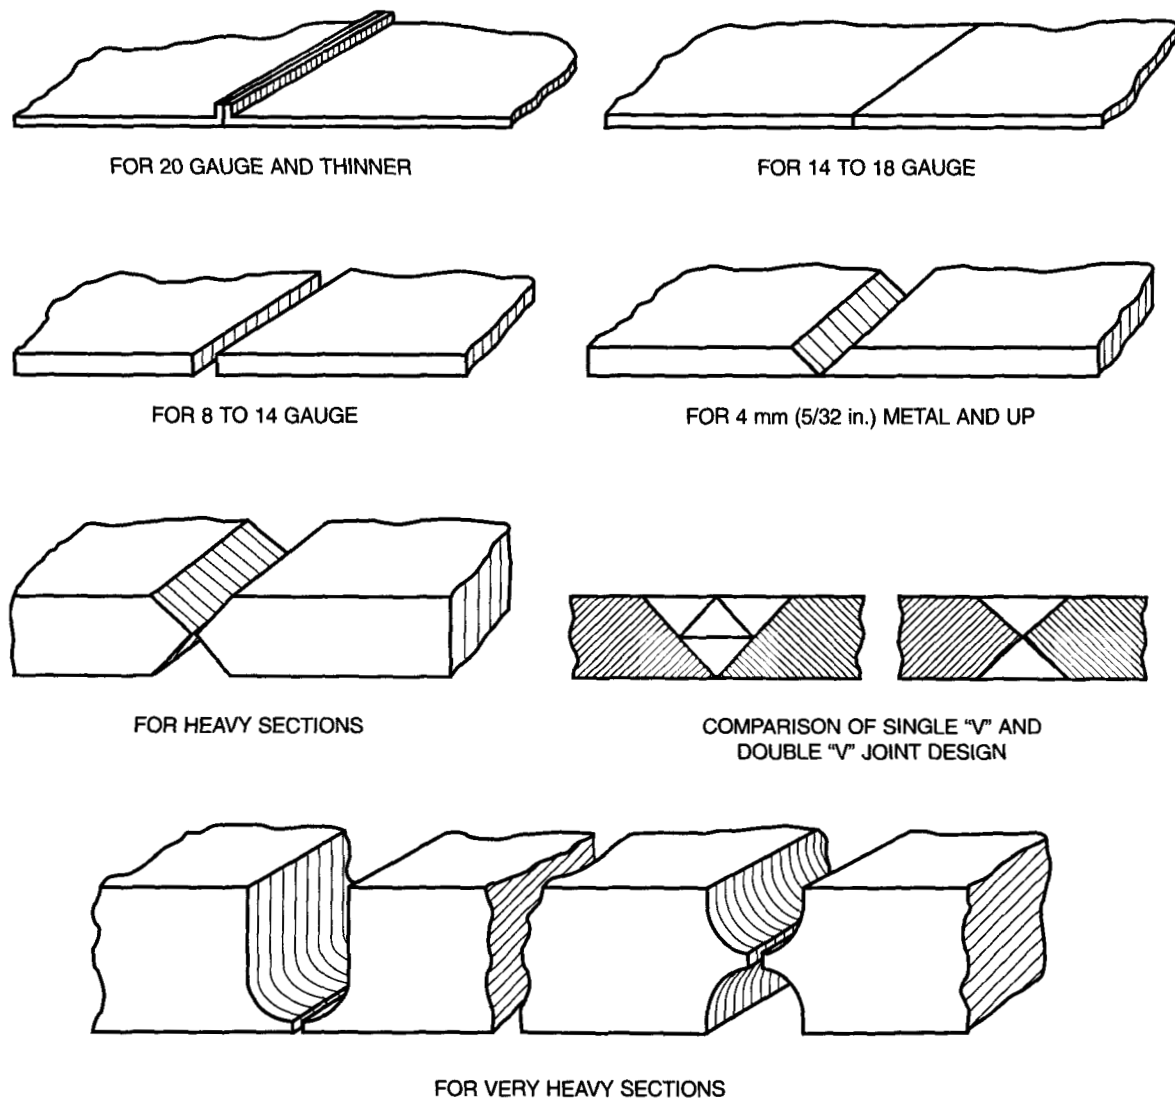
Typical Weld Joints for Various Thicknesses of Base Metal
